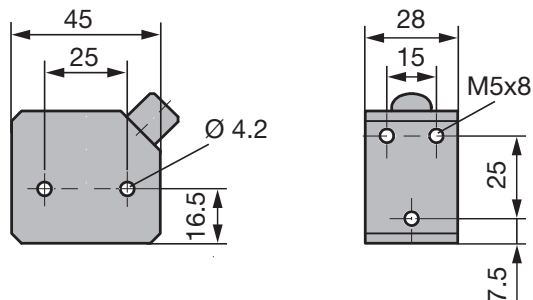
Installation dimensions of BTL5-P-4500-1 magnet
